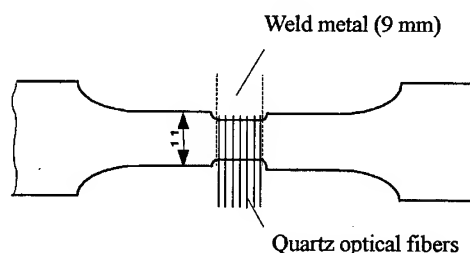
HK-40 waisted cross-weld specimen and stuck fibers
